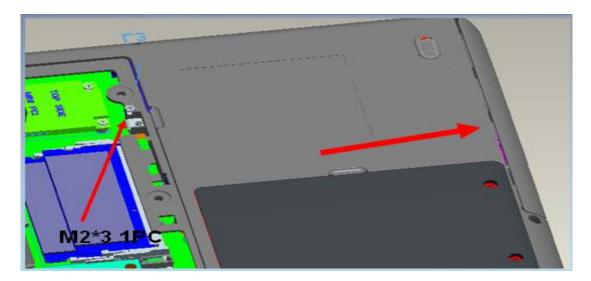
Remove the screw on ODD Bezel and ODD
